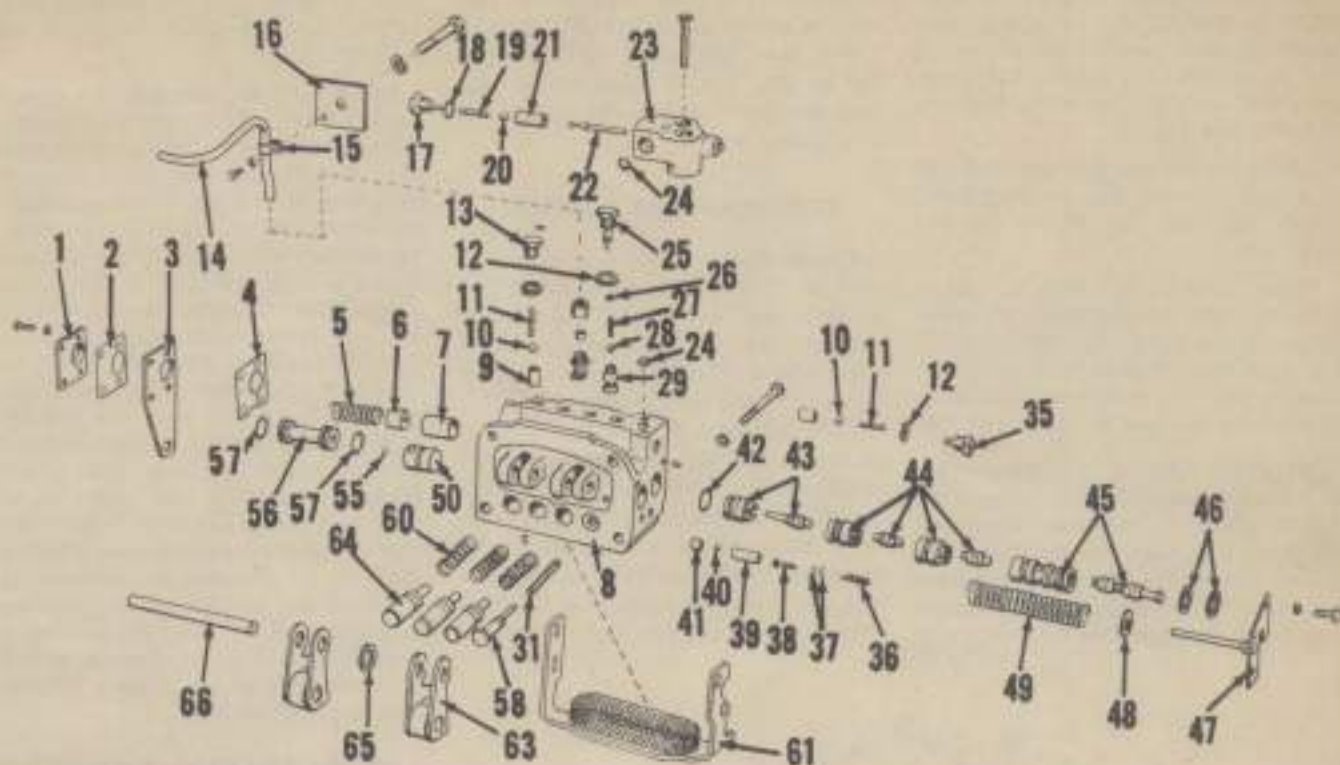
Exploded view of prior production hydraulic pump. Later production pump is shown in Fig. 150. Spring (19) has been deleted.
